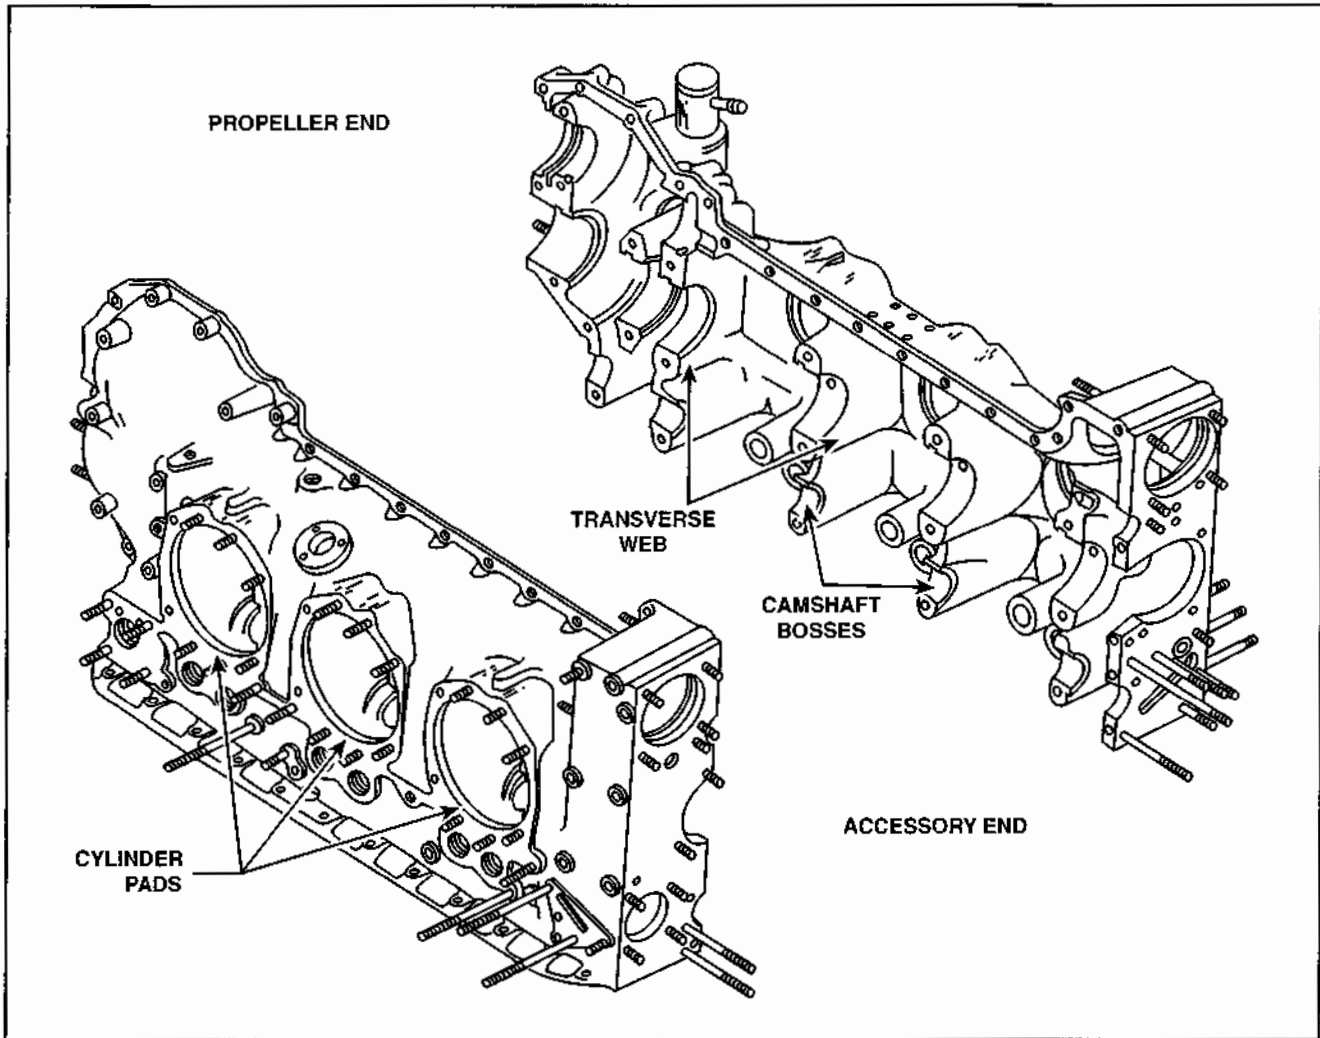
The transverse webs in the crankcase support the main bearings and a set of camshaft bosses support the camshaft.
